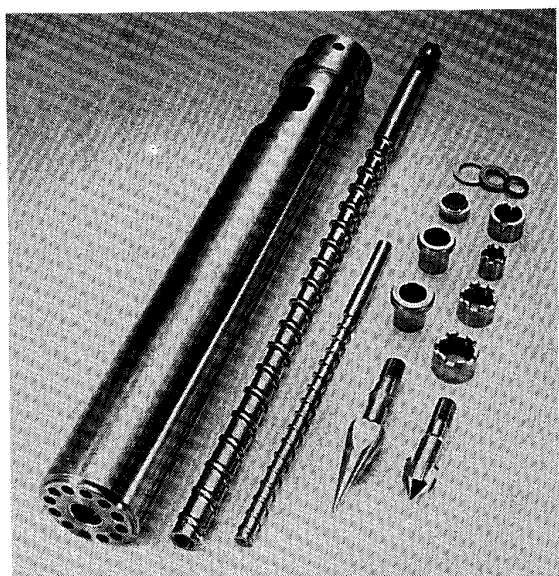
Various injection molding machine parts composed of Mo_2FeB_2 complex boride base hard alloys.
